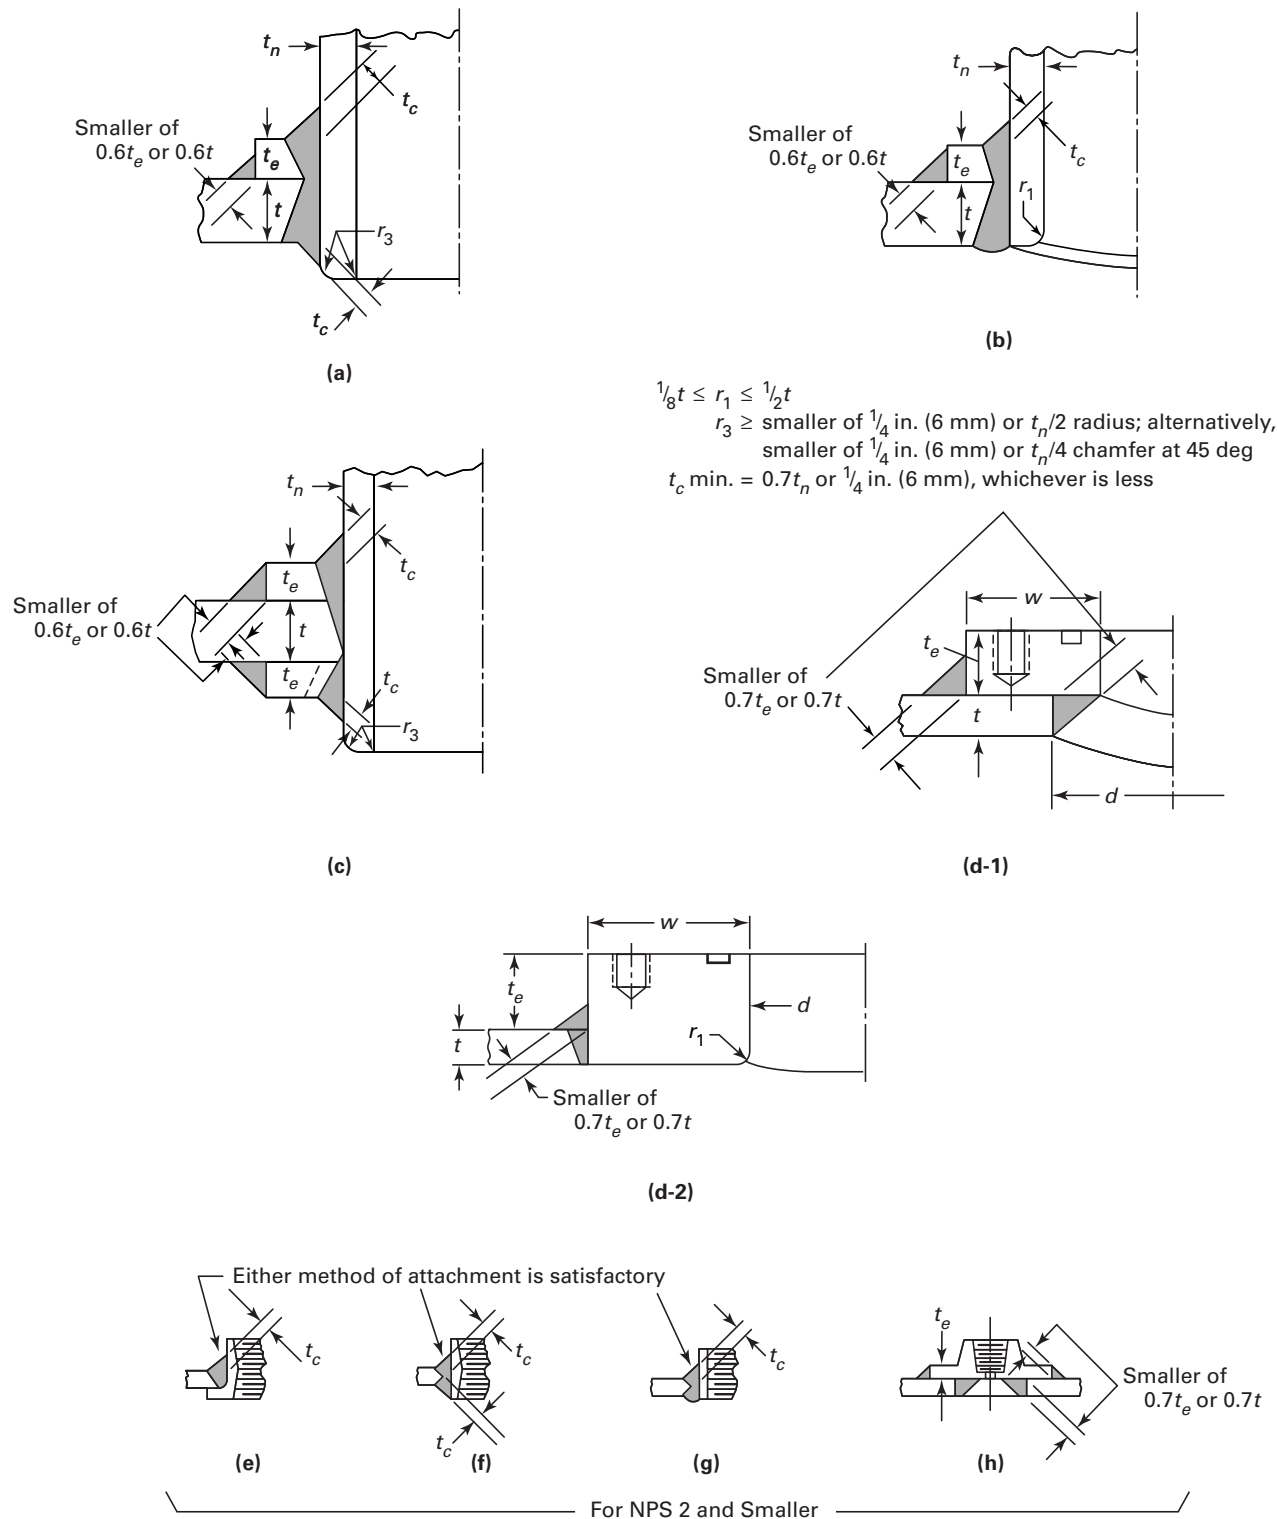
SOME ACCEPTABLE PAD AND SCREWED FITTING TYPES OF WELDED NOZZLES AND OTHER CONNECTIONS TO SHELLS, DRUMS, AND HEADERS
